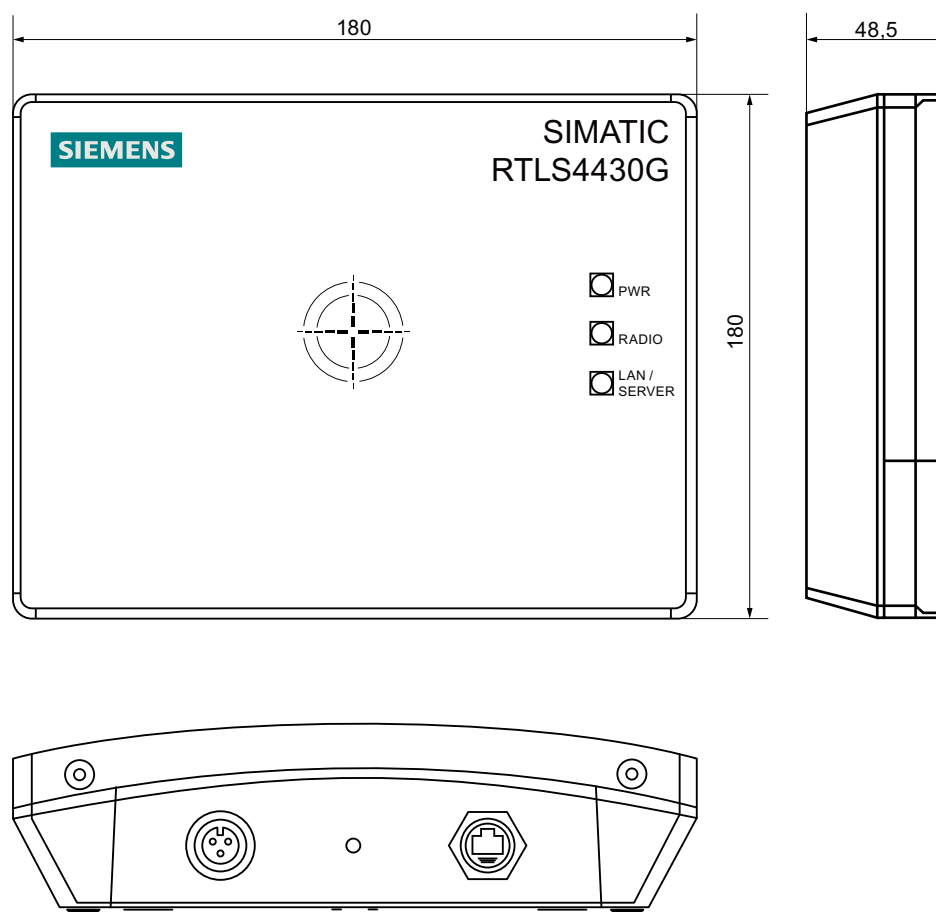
Dimension drawing SIMATIC RTLS4430G - All dimensions specified in millimeters
